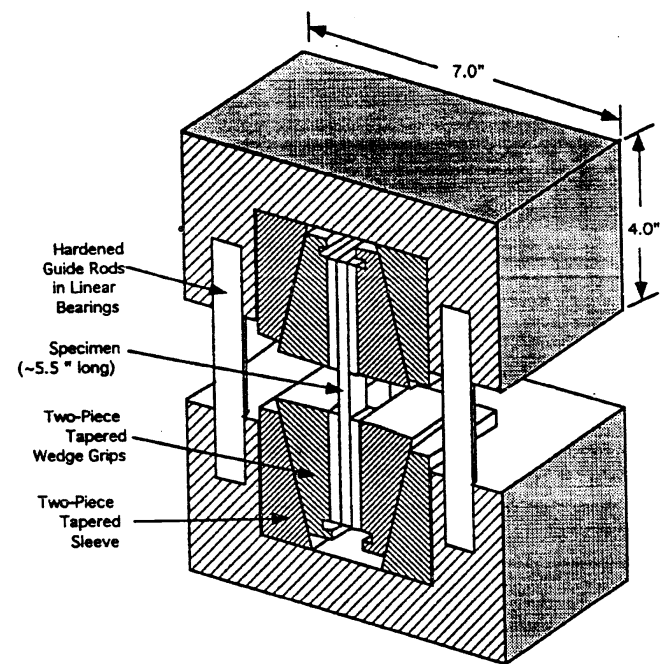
(b) Schematic of ASTM D 3410-87 method B test fixture and specimen.
